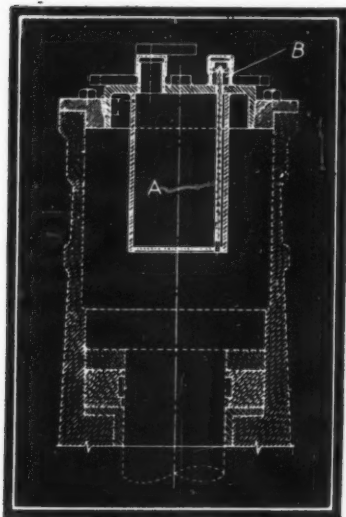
Oil thrown by centrifugal force to the top of the metering tube is delivered to lubricate the roll journal while the mill is operating. Obviously, no oil will be supplied when the machine is stopped
